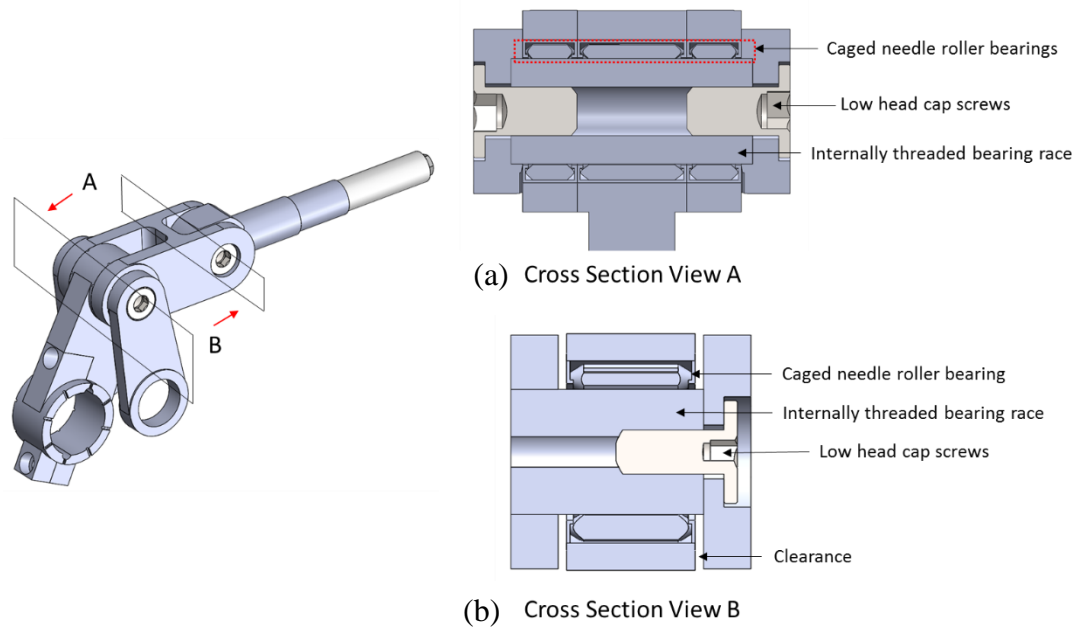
Cross section view of linkage assembly near double shear zone and piston bearing mount
